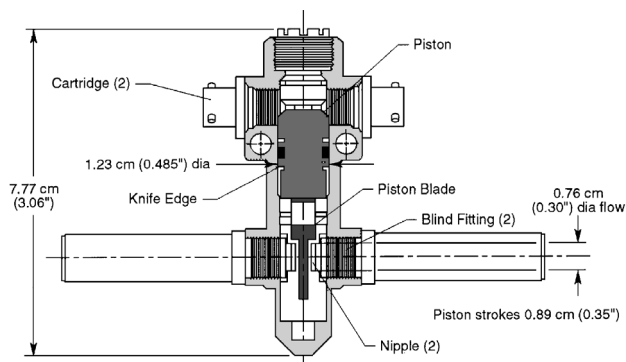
Cross-sectional view of Quantic pyrovalve; body and blind fittings are stainless steel.
